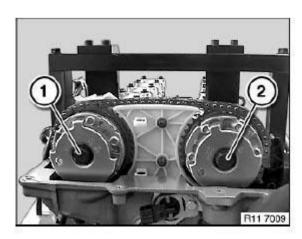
Identifying Special Tool (11 4 283) On Cylinder Head Courtesy of BMW OF NORTH AMERICA, INC.
